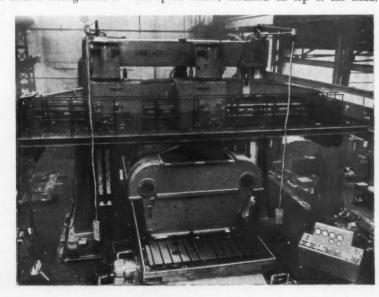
Kendall & Gent 29½ by 12 by 8½ ft. Plano-milling Machine
